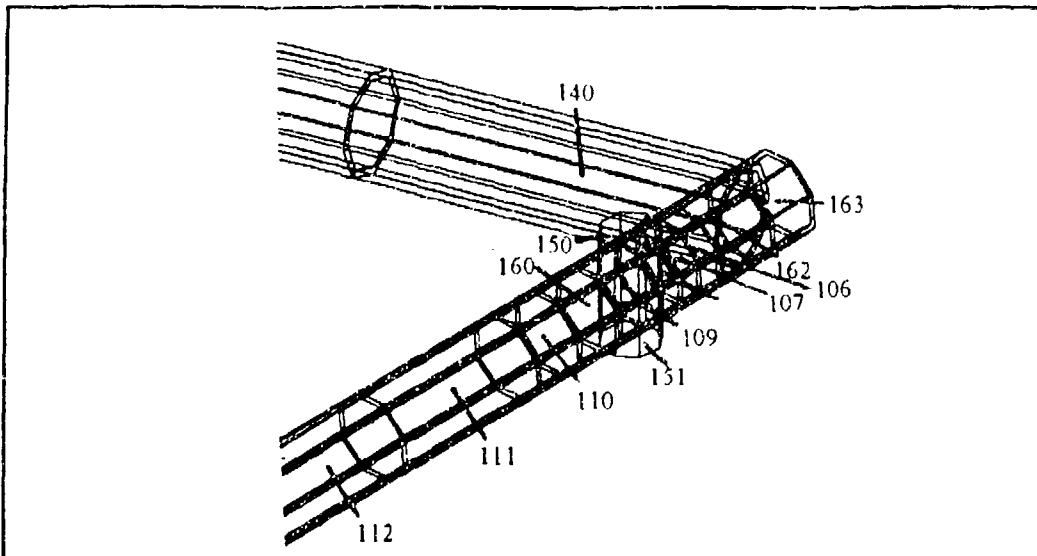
Attachment Point of Left Longitudinal Tube and Torque Tube
